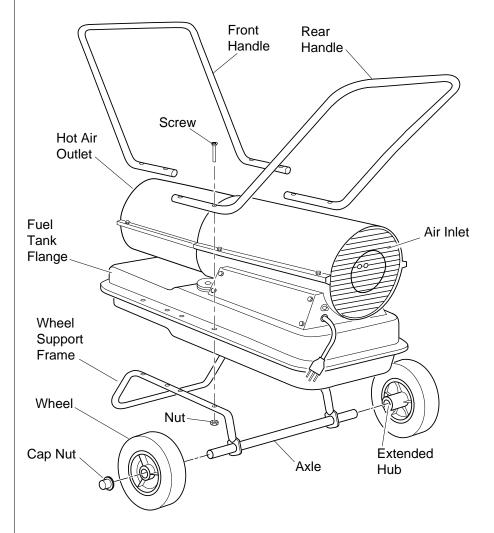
Wheel and Handle Assembly, 100/150 Models Only
